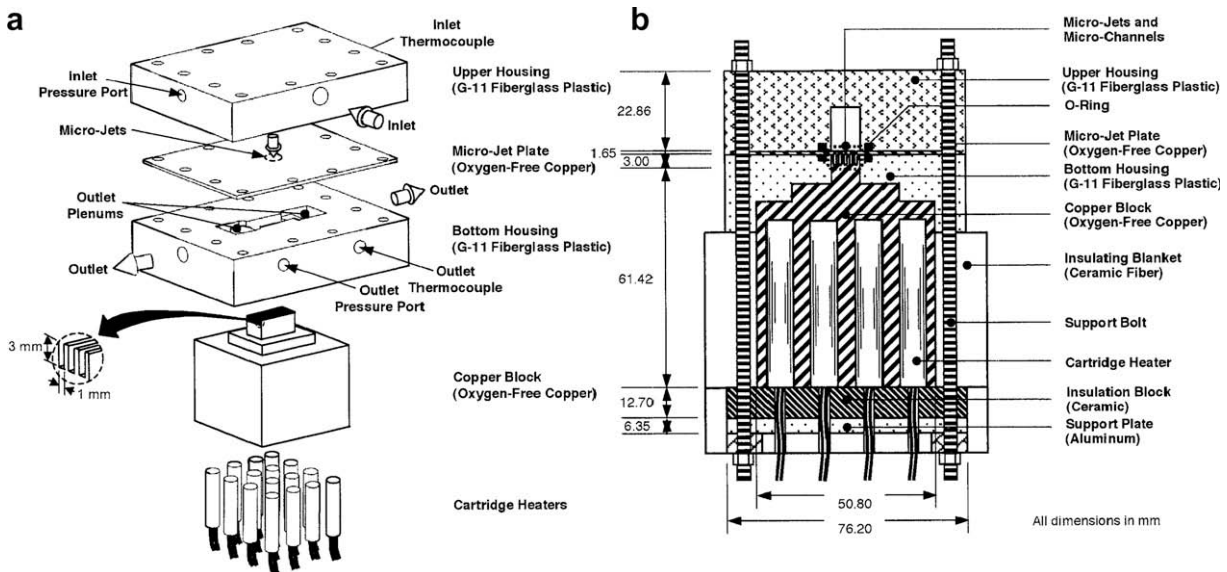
(a) Test module construction. (b) Cross-section of test module assembly.
